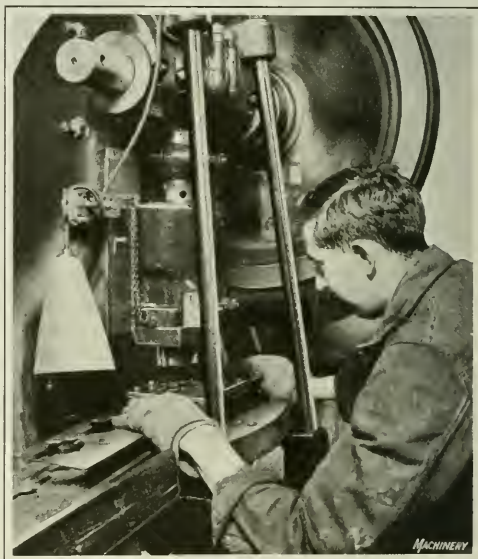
Power Press equipped with Simple Stamping Dies for making the End Plates of Variable Condensers
